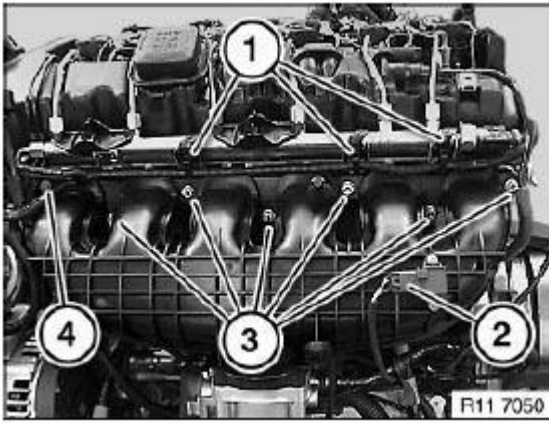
Identifying Retainers On Fuel Rail And Nuts
